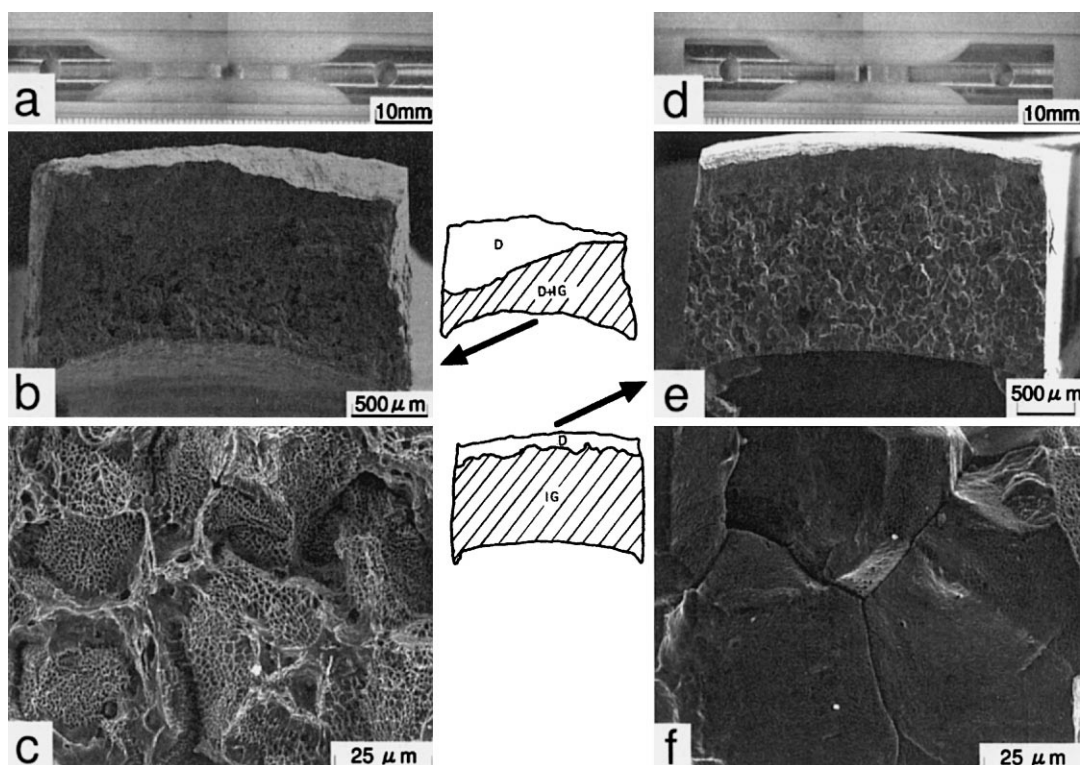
The appearance (a, d), the whole cross-section (b, e) and magnified view of intergranularly fractured surface (c, f) for tensile-tested weld C1 (a, b, c) and weld C3 (d, e, f). The difference in the mode of intergranular fracture was apparent in (c) which was covered with ductile dimples and in (f) which was covered with smooth dimples. The inserted sketches represent (b) and (e) indicating the mode of fracture: D for ductile dimple fracture, D + IG for intergranular fracture with ductile dimples as shown in (c), IG for intergranular fracture.
